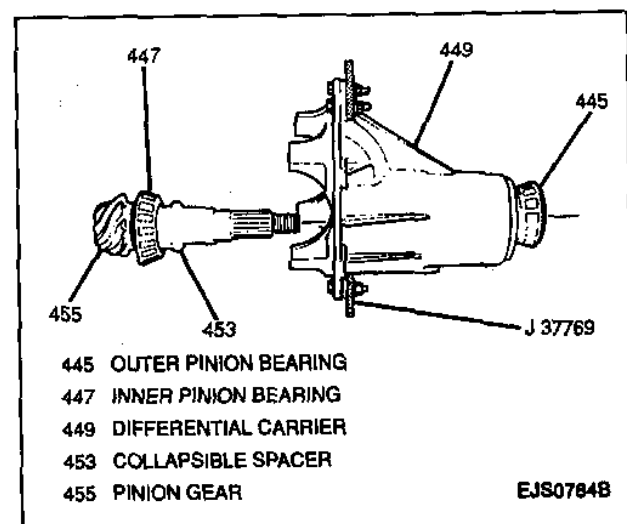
Installing Pinion Gear and Outer Pinion Bearing
